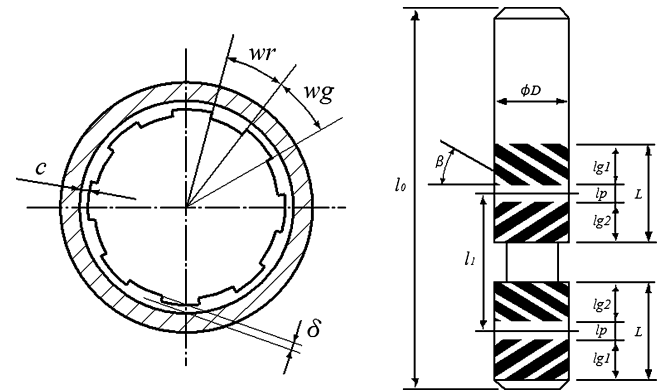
Detailed design parameters of herringbone-grooved journal bearings.
